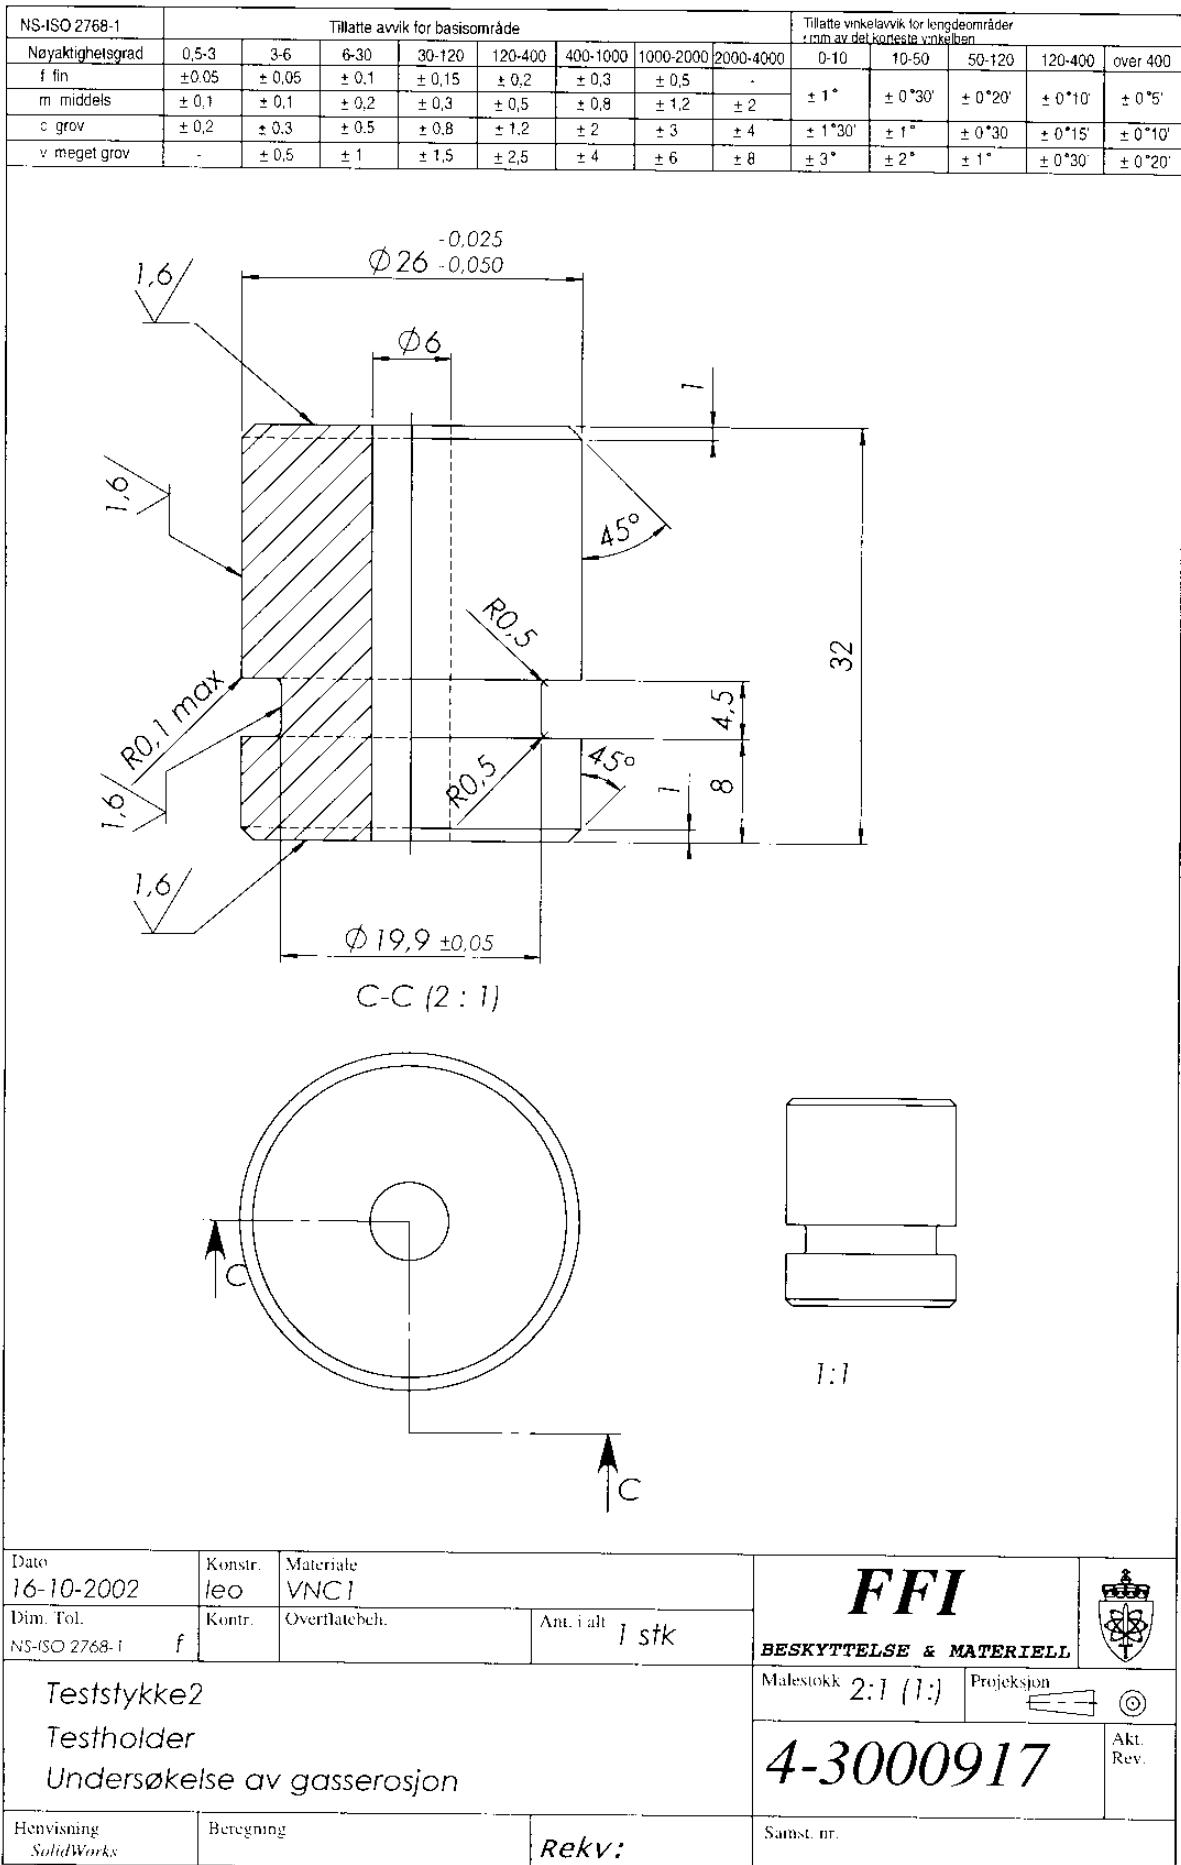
Drawing of the nozzle with largest bore diameter (6 mm).
